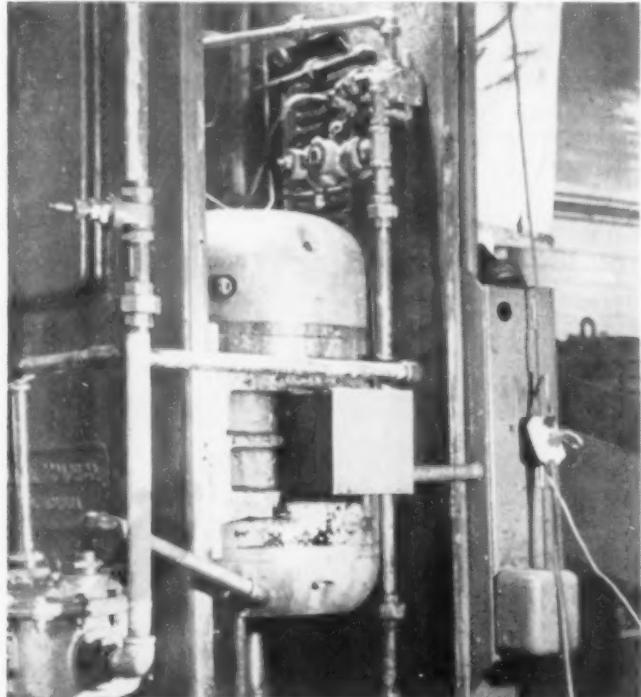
is a pre-JIC view of a broaching machine. Note water cooler, necessary to keep oil at reasonable operating temperature.
